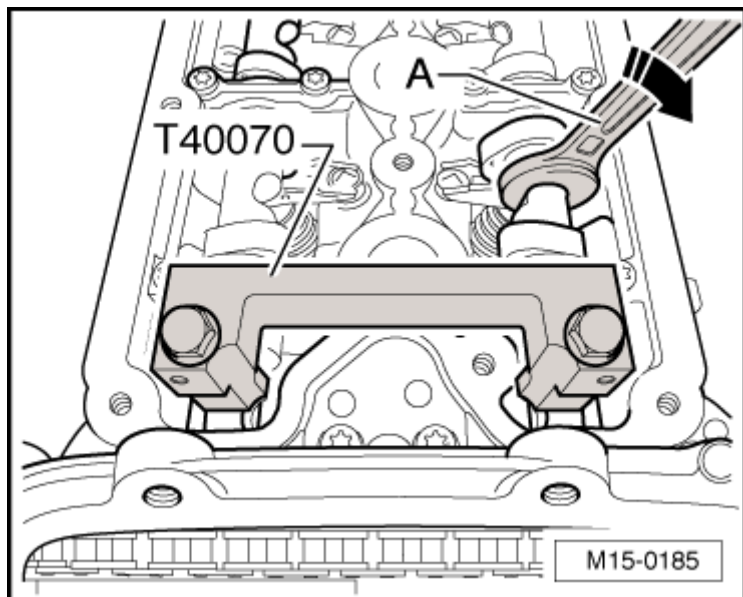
Identifying Camshaft Clamp T40070 Installed On To Camshafts
